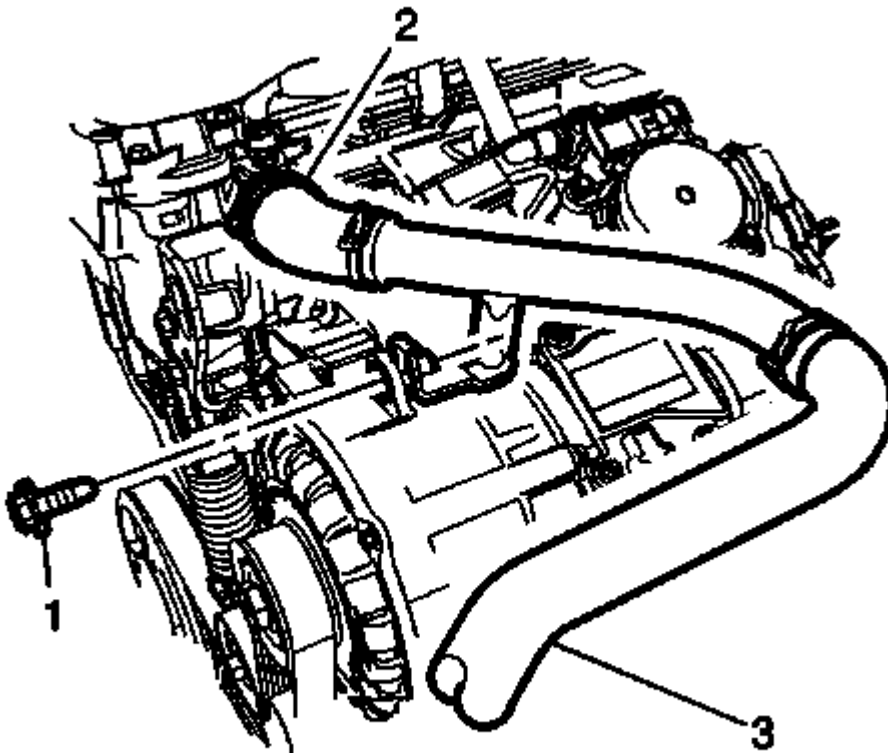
Radiator Inlet Hose, Bracket & Bolt
